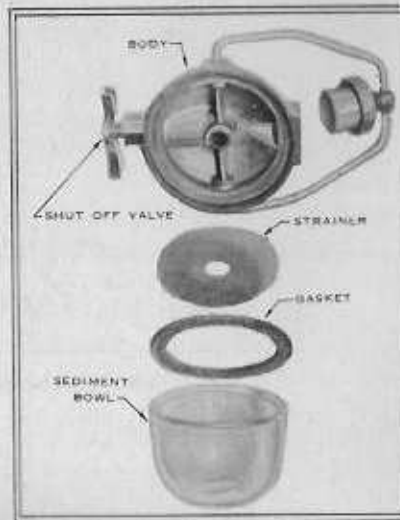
FUEL STRAINER AND SHUT OFF VALVE ASSEMBLY
